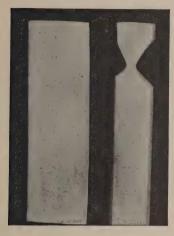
A, Shows double tube rod No. 30. B, Shows double tube rod No. 30 with V shaped cuts. Times for making cuts 35 and 45 secs., using 4 inch Carborundum wheel grade M, grit 80. Spindle speed 1200.
